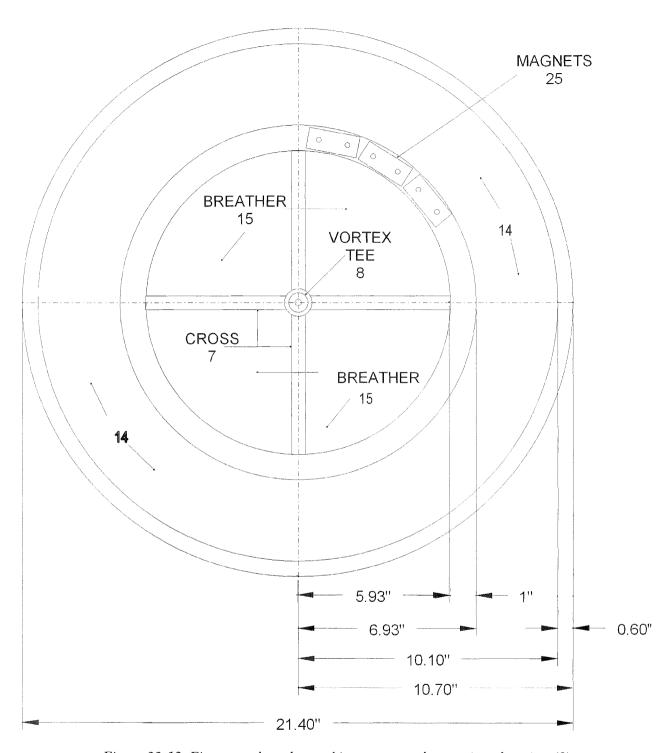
First stage breather and inner cone — lower wing plan view (3)
